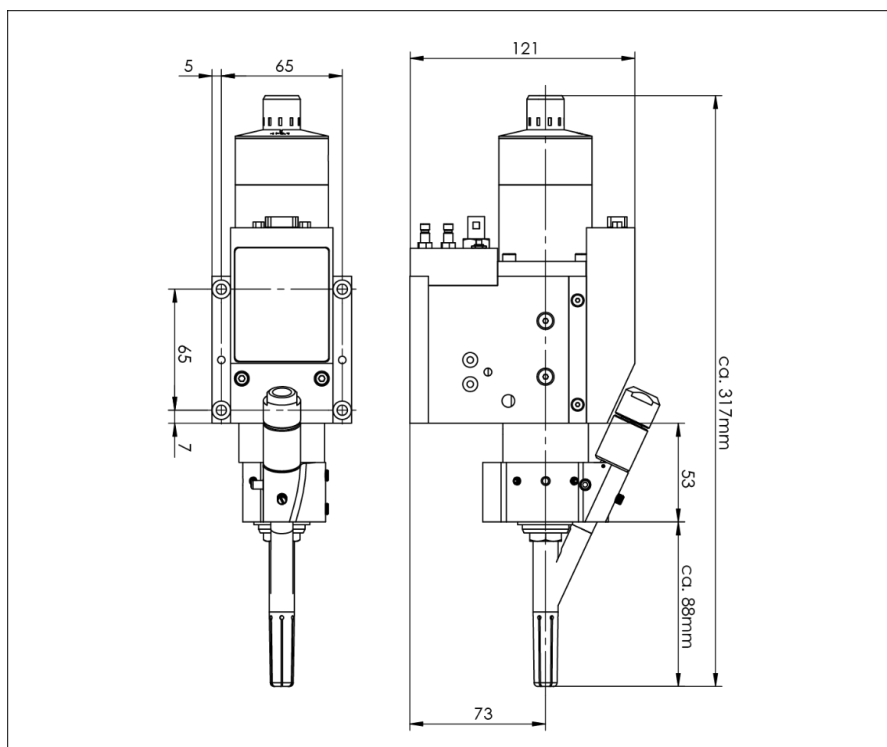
Dimensions of SK-5AP stud welding head
